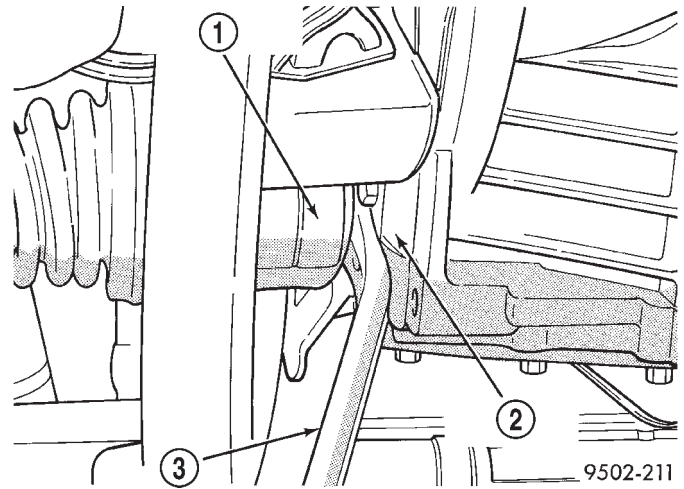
Disengaging Inner Tripod Joint From Transaxle
